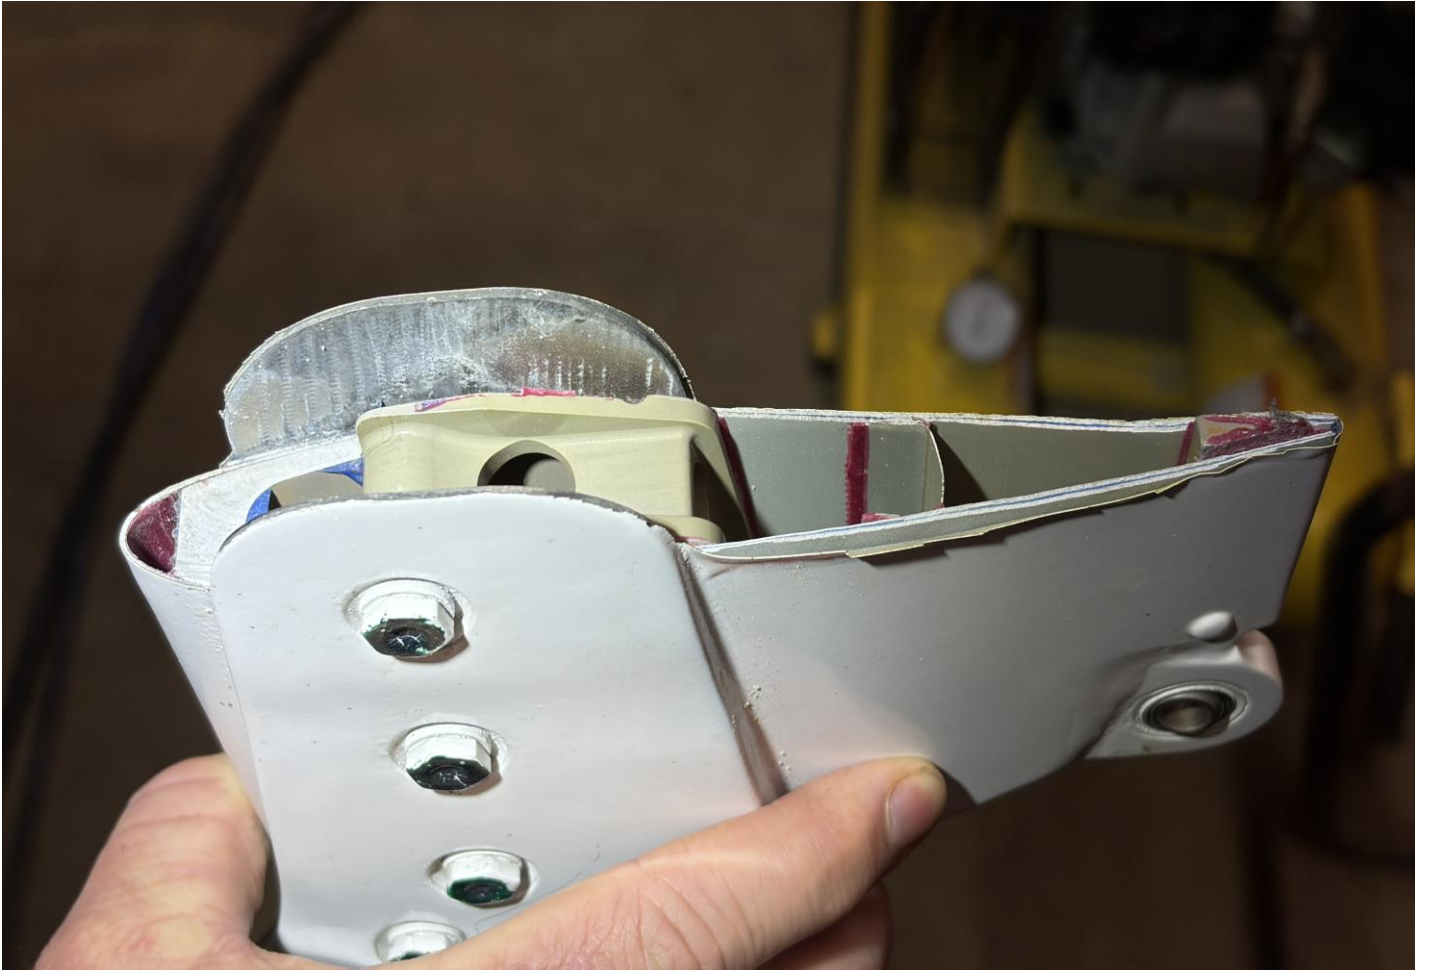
MD manufactured blade showing crack indication at the root fitting, confirmed by paint removal.
